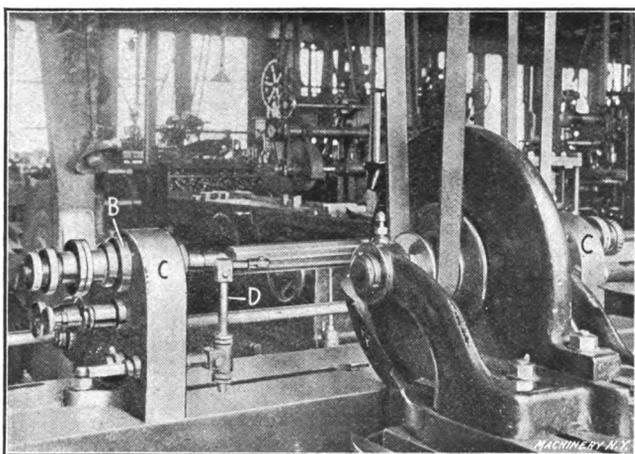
Rear View of Reamer Grinding Attachment, showing Tooth Gage
